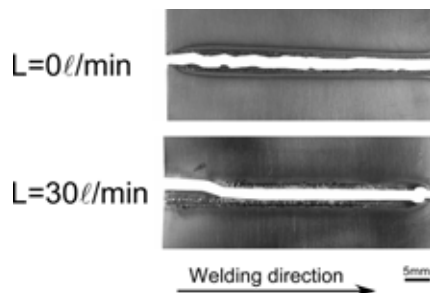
Appearance of crack after cracking test. (P=5.9kN, V=600mm/min)
